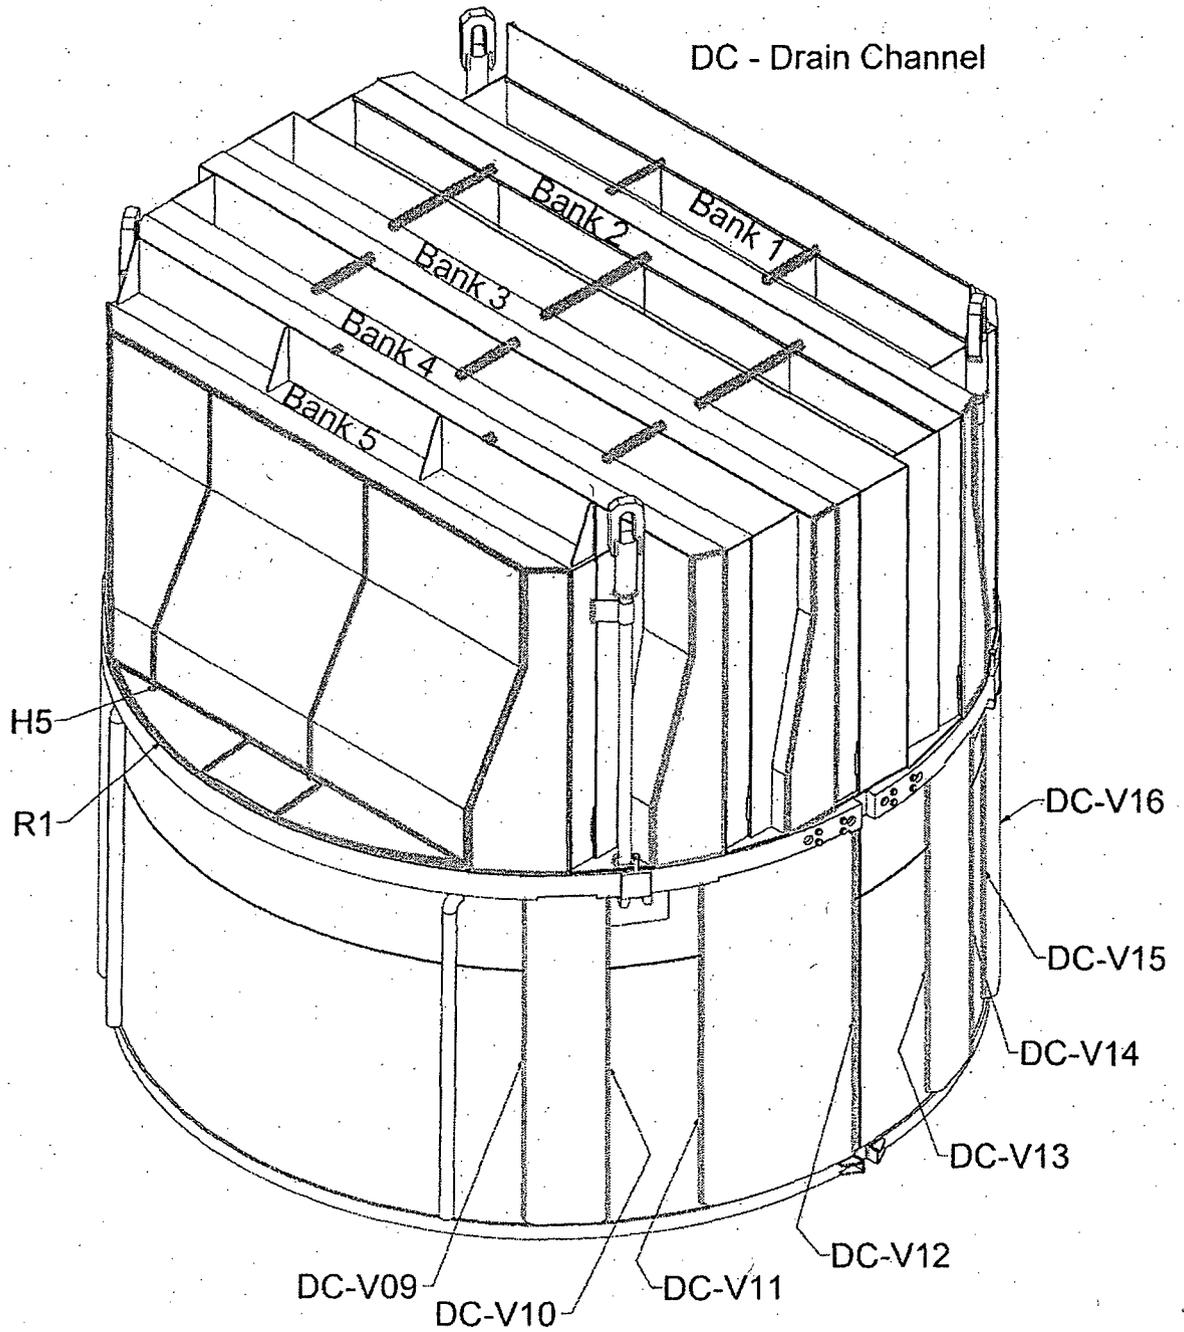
Inspection Locations (Slanted Hood Dryer)
